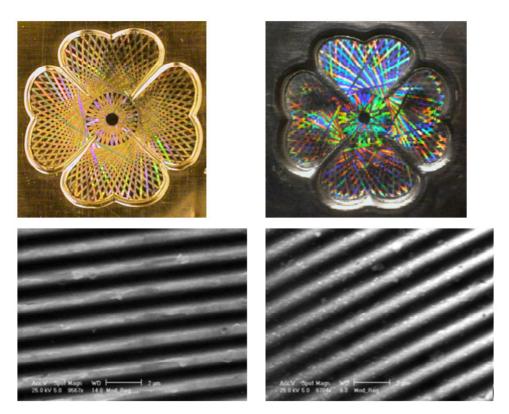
Examples of embossing onto sheet from a coin with a holographic image (about 2.5 cm across) into 0.13 mm thick soft copper sheet (left) and 0.25mm thick 5052-H32 sheet. Both experiments had rough vacuum on both sides of the sheet and a standoff of 2.32 mm. The copper was formed at 2.4 kJ; the aluminum was formed at 4.0 kJ. SEM images compare the original holographic surface (electroformed nickel) and the pattern embossed in the copper (right). In both cases the entire area formed was about $100 \times 75 = 100$ mm
